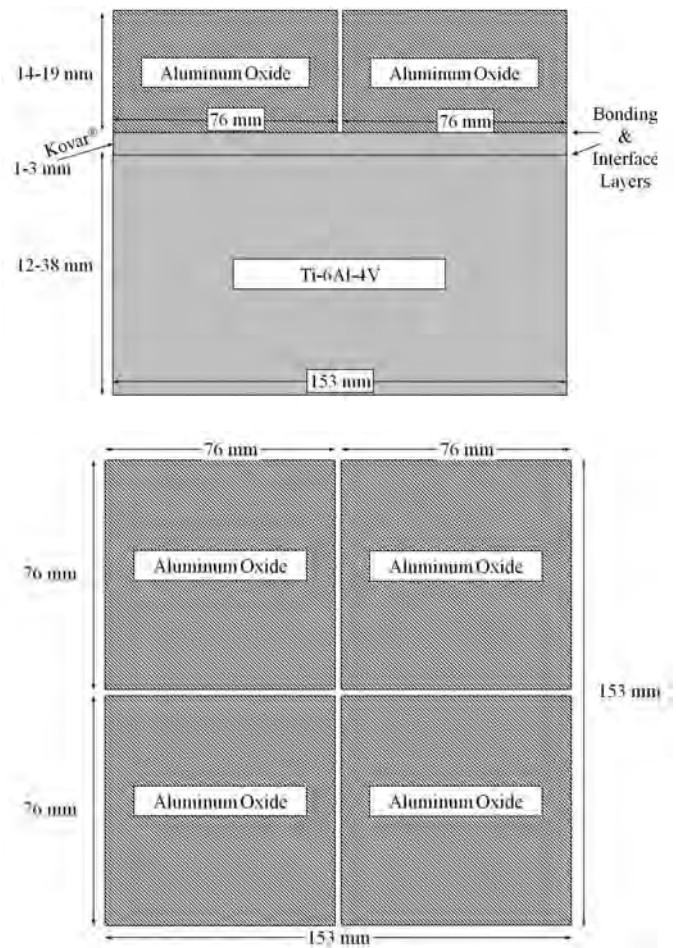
Top: Side view of multi-tile ceramic-metal active brazing samples. Bottom: Top view of active brazing samples.
